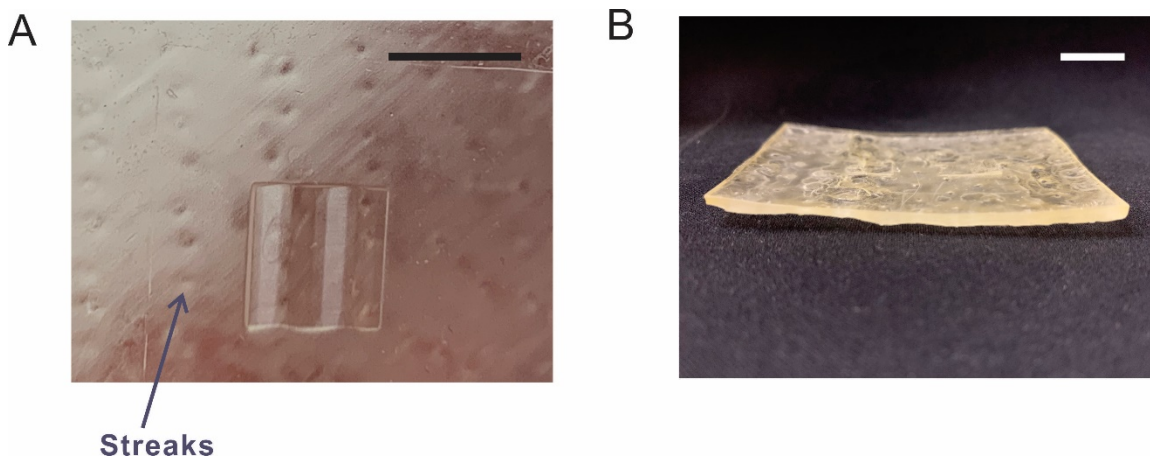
A: Close view of SLA resin mold showing surface roughness generated by the 3-D printer; B: Resin mold curvature example. Scale bar: 10 mm.
